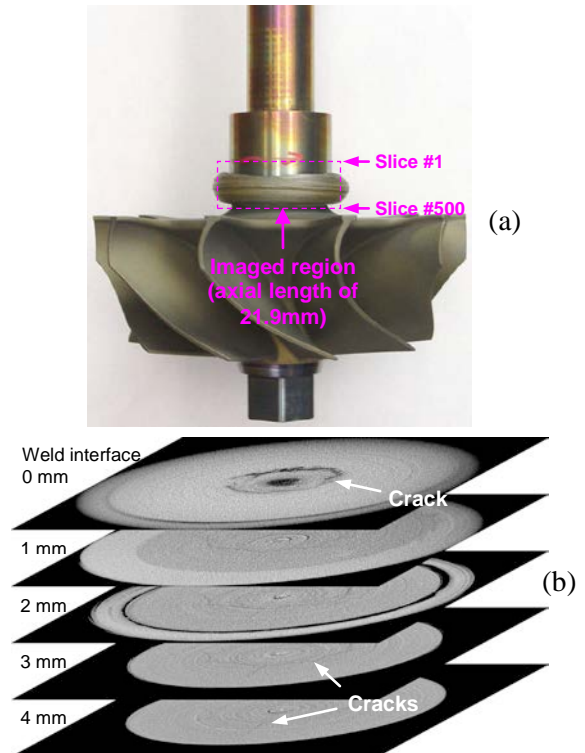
(a) Welding sample #3 and (b) typical x-ray CT slices around the welding interface.
